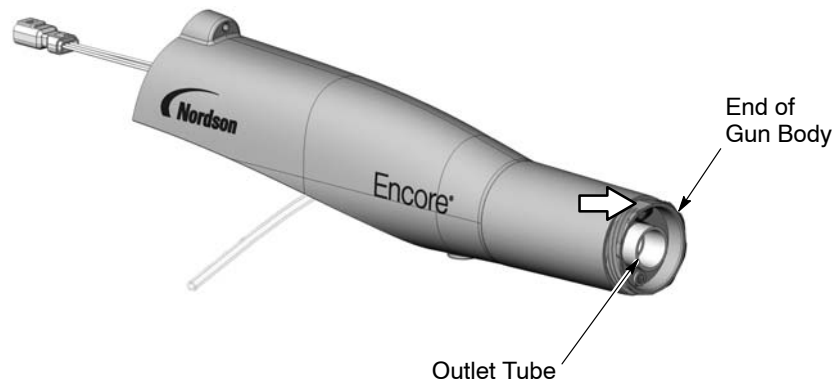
Positioning the Outlet Tube Prior to Installing the Gun Body on the Handle
